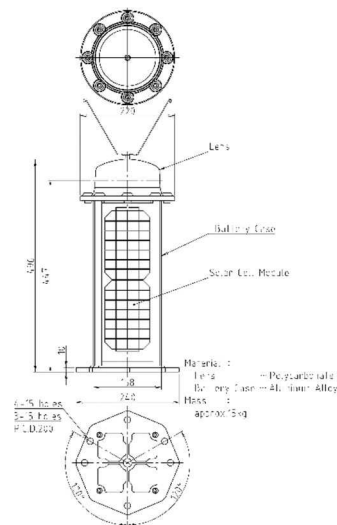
(12) Typical cross section drawing of beacon lights (replacement light)
